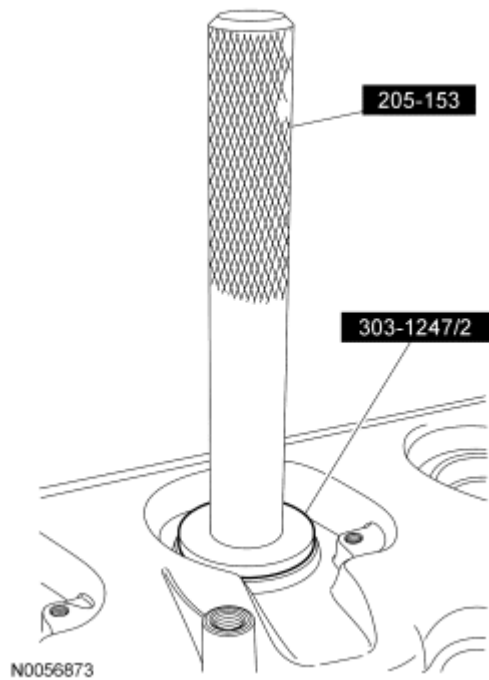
Installing VCT Solenoid And/Or Spark Plug Tube Seals Using Special Tools (205-153) & (303-1247/2)
